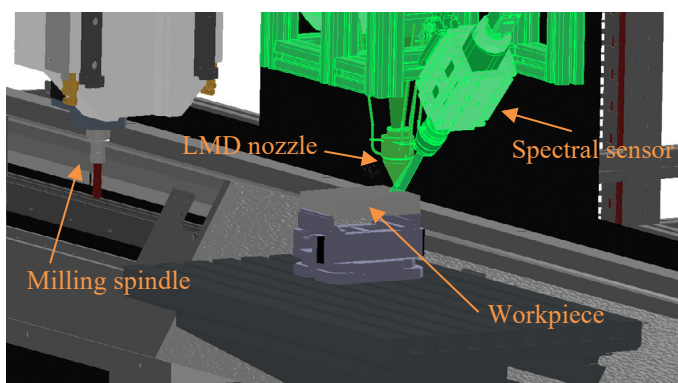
MiCLAD machine with LMD station (green) and milling spindle.
